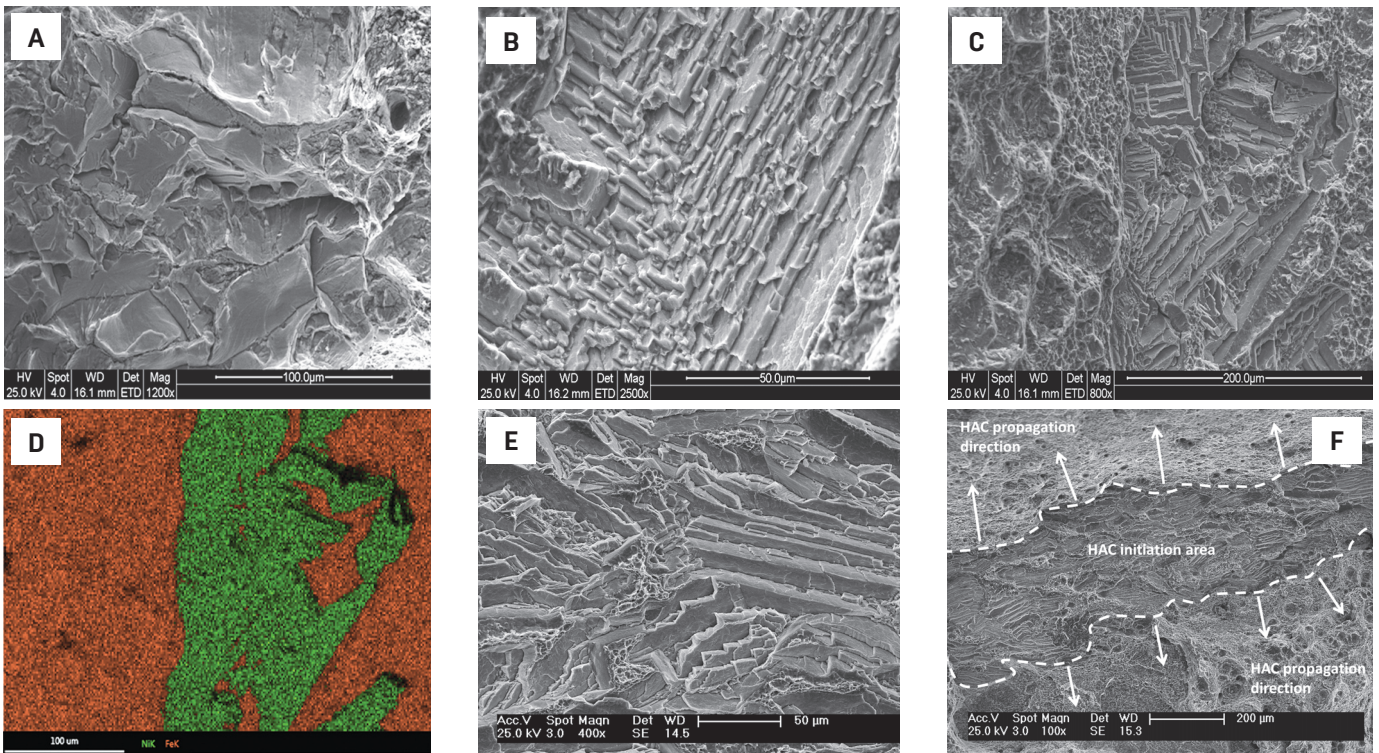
Typical morphology of the “dark green” fracture in the selected PWHT conditions: A — Cleavage and quasi-cleavage fracture surface of sample 660°C/20 h from Fig. 9D; B — terrace fracture surface of sample 660°C/20 h from Fig. 9D; C — terrace fracture surface surrounded by a more ductile fracture surface of sample 660°C/20 h from Fig. 9D; D — the EDX map of Fig. 15C; E — terrace fracture surface of sample 660°C/50 h from Fig. 9E; F — HAC initiation area surrounded by HAC propagation area, with propagation directions shown.
